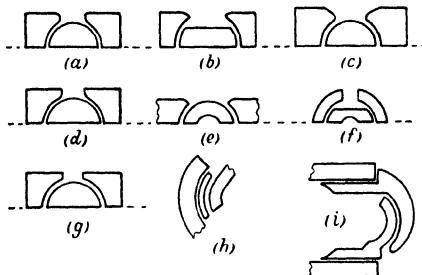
Types of pole piece and core for moving coil instruments.
